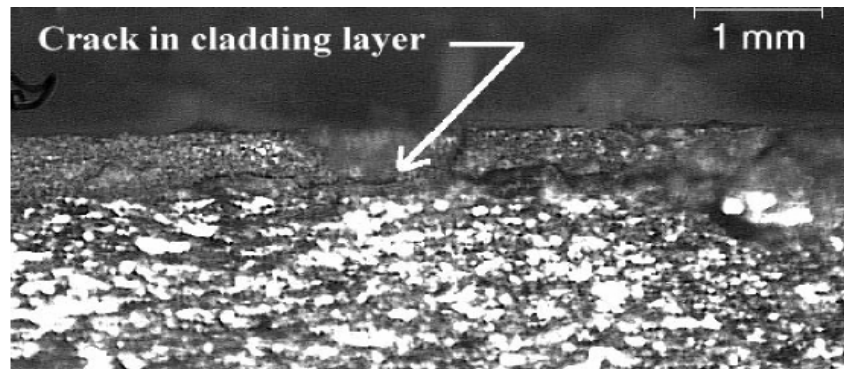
Cracks in cladding layer for adhesive failure in a 7075-T6 lap shear specimen.
